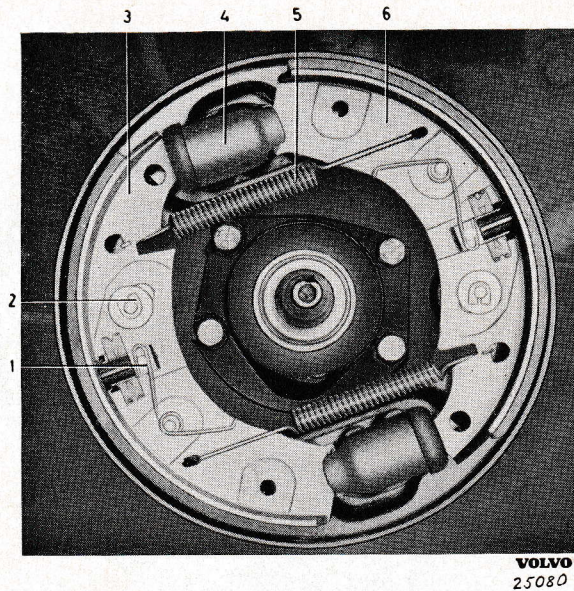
Wheel brake unit, early production, left-hand front wheel.
